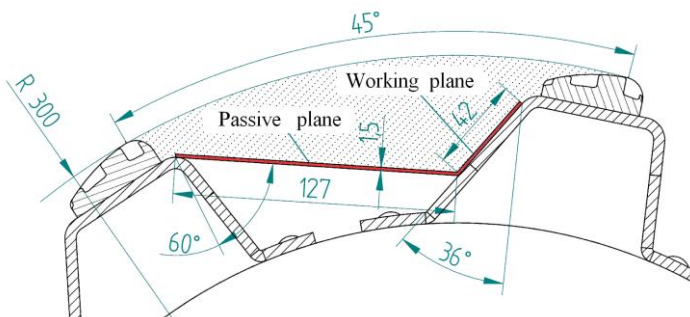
Spaces between threshing cylinder rasp bars covered by filler plates III
